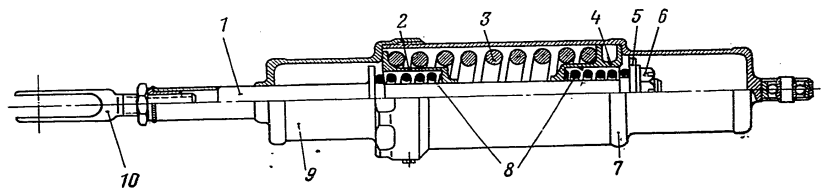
HAND CONTROL SYSTEM SPRING FEEL MECHANISM
